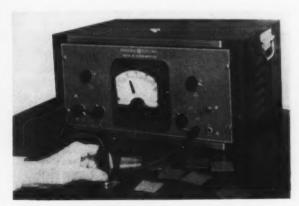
The new test head in use with the electronic unit. Correct application of the head to the part being inspected is shown.
